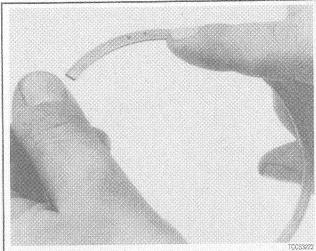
Most rings are marked to show which side of the ring should face up when installed to the piston
